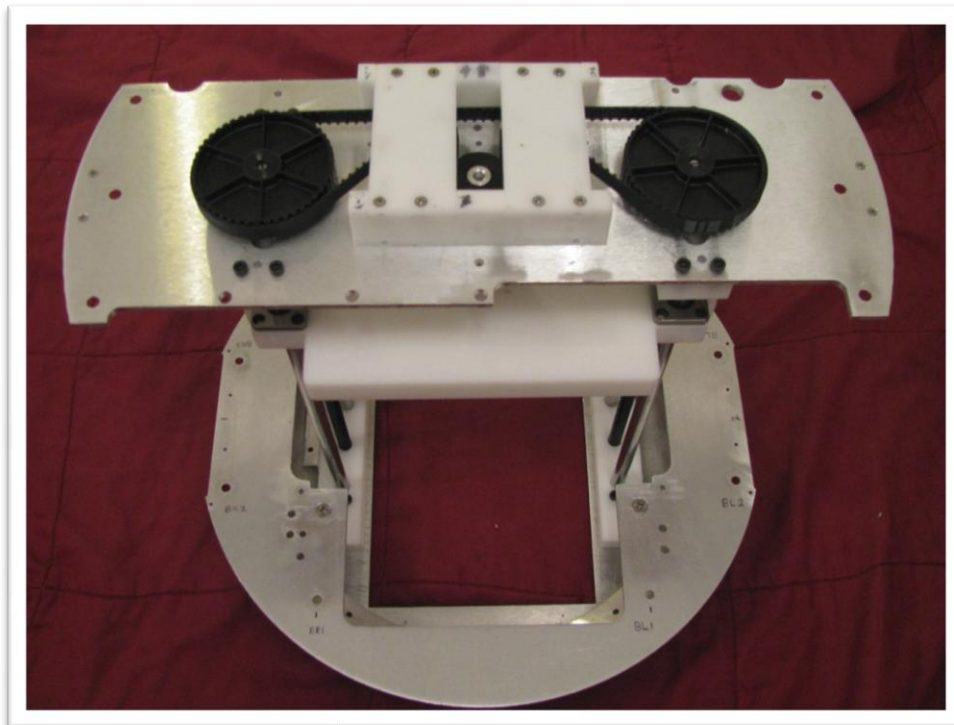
2-3-2 Center foot mechanism top timing gears - Photo by: Blake Mann
